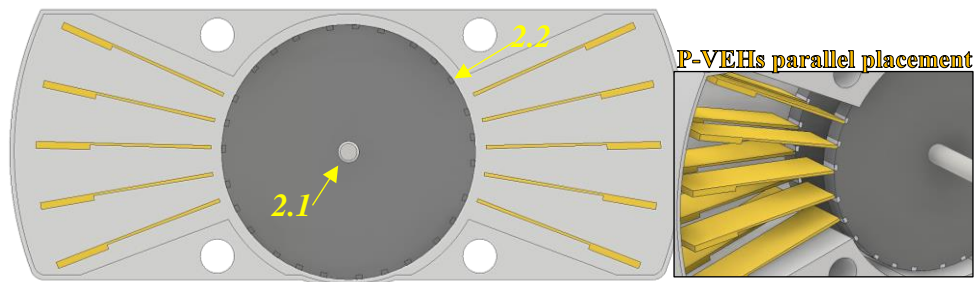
UCD - Internal placement of magnet wheel and “P-VEHs” (Mide Technology 1305YB)
